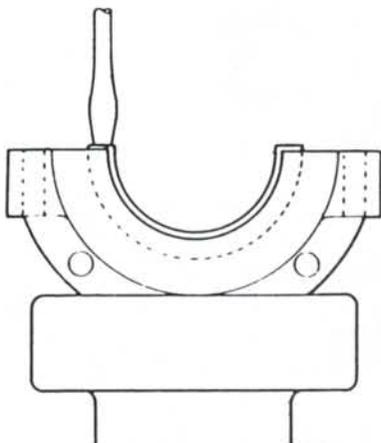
When renewing packing in crankshaft rear seal retainer, use a blunt tool to tamp packing ends below face of retainer.
